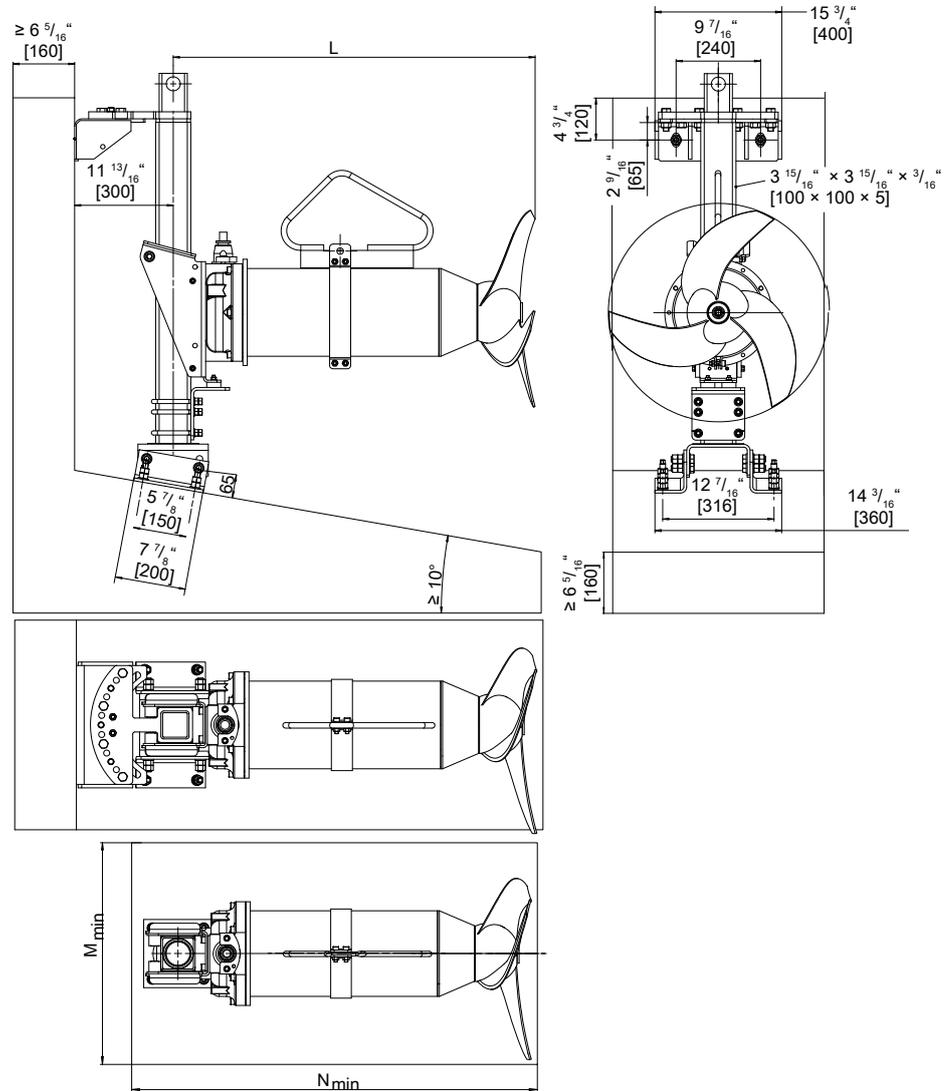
Installation of accessories 22 – Amamix 400 (size 4135 only) / 600
